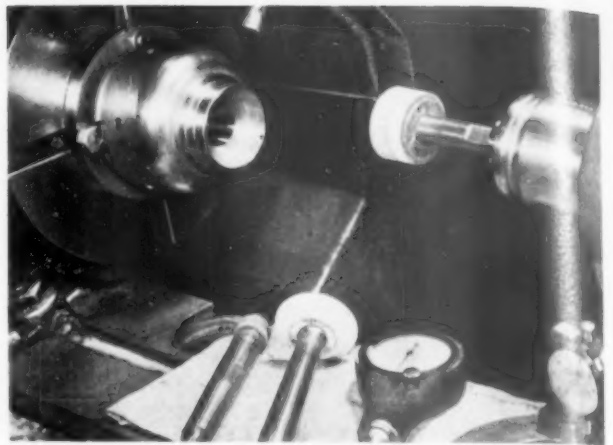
10 inch universal grinder converted for quick change from straight to tapered holes, and for face grinding.
